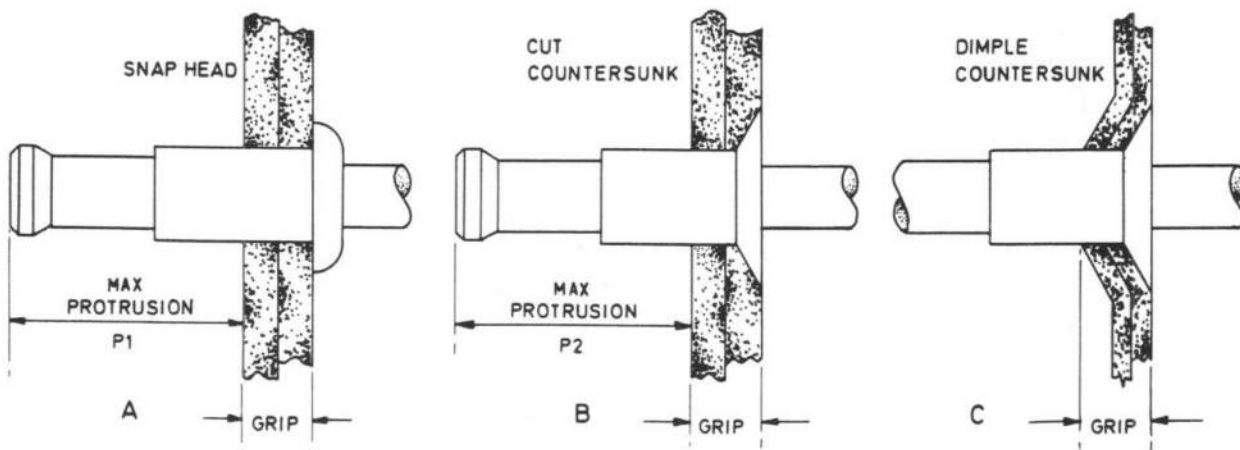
Avdel (Al. alloy) rivet grip and stem protrusion
